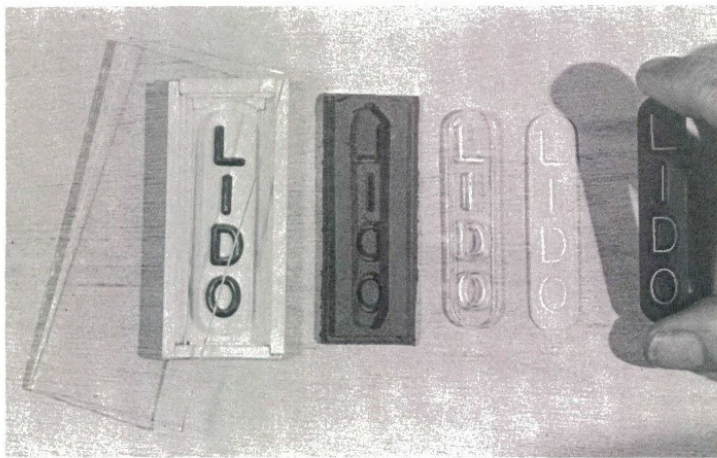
The Lido's vertical sign starts with a master, shown here mounted in its casting box. Next is the RTV rubber mold made from the master, then a resin casting made from the mold, a casting with its surface gloss removed, and finally a finished, painted vertical sign.
